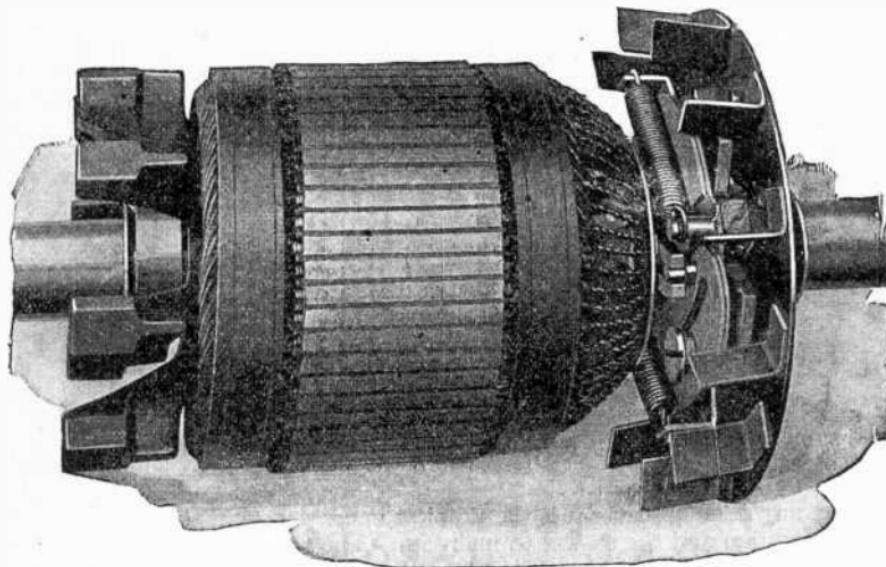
,706.—*Wagner internal resistance motor construction 1.* Armature showing low resistance winding, centrifugal governor and fans. There is a fan on each end of the armature; on the pulley end the blades are designed so that they may be used in balancing the armature, and on the opposite end the blades are spot welded to a steel plate which is rigidly bolted to the core of the armature. The low resistance insulated winding is brought out to a multi-contact short circuiting switch. The squirrel cage which underlies the insulated winding is formed of copper bars and copper rings which are brazed together, forming permanent unbreakable joints.
